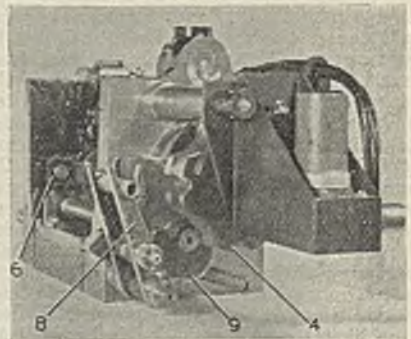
View from casewheel end, showing photo-cell housing with cover removed
